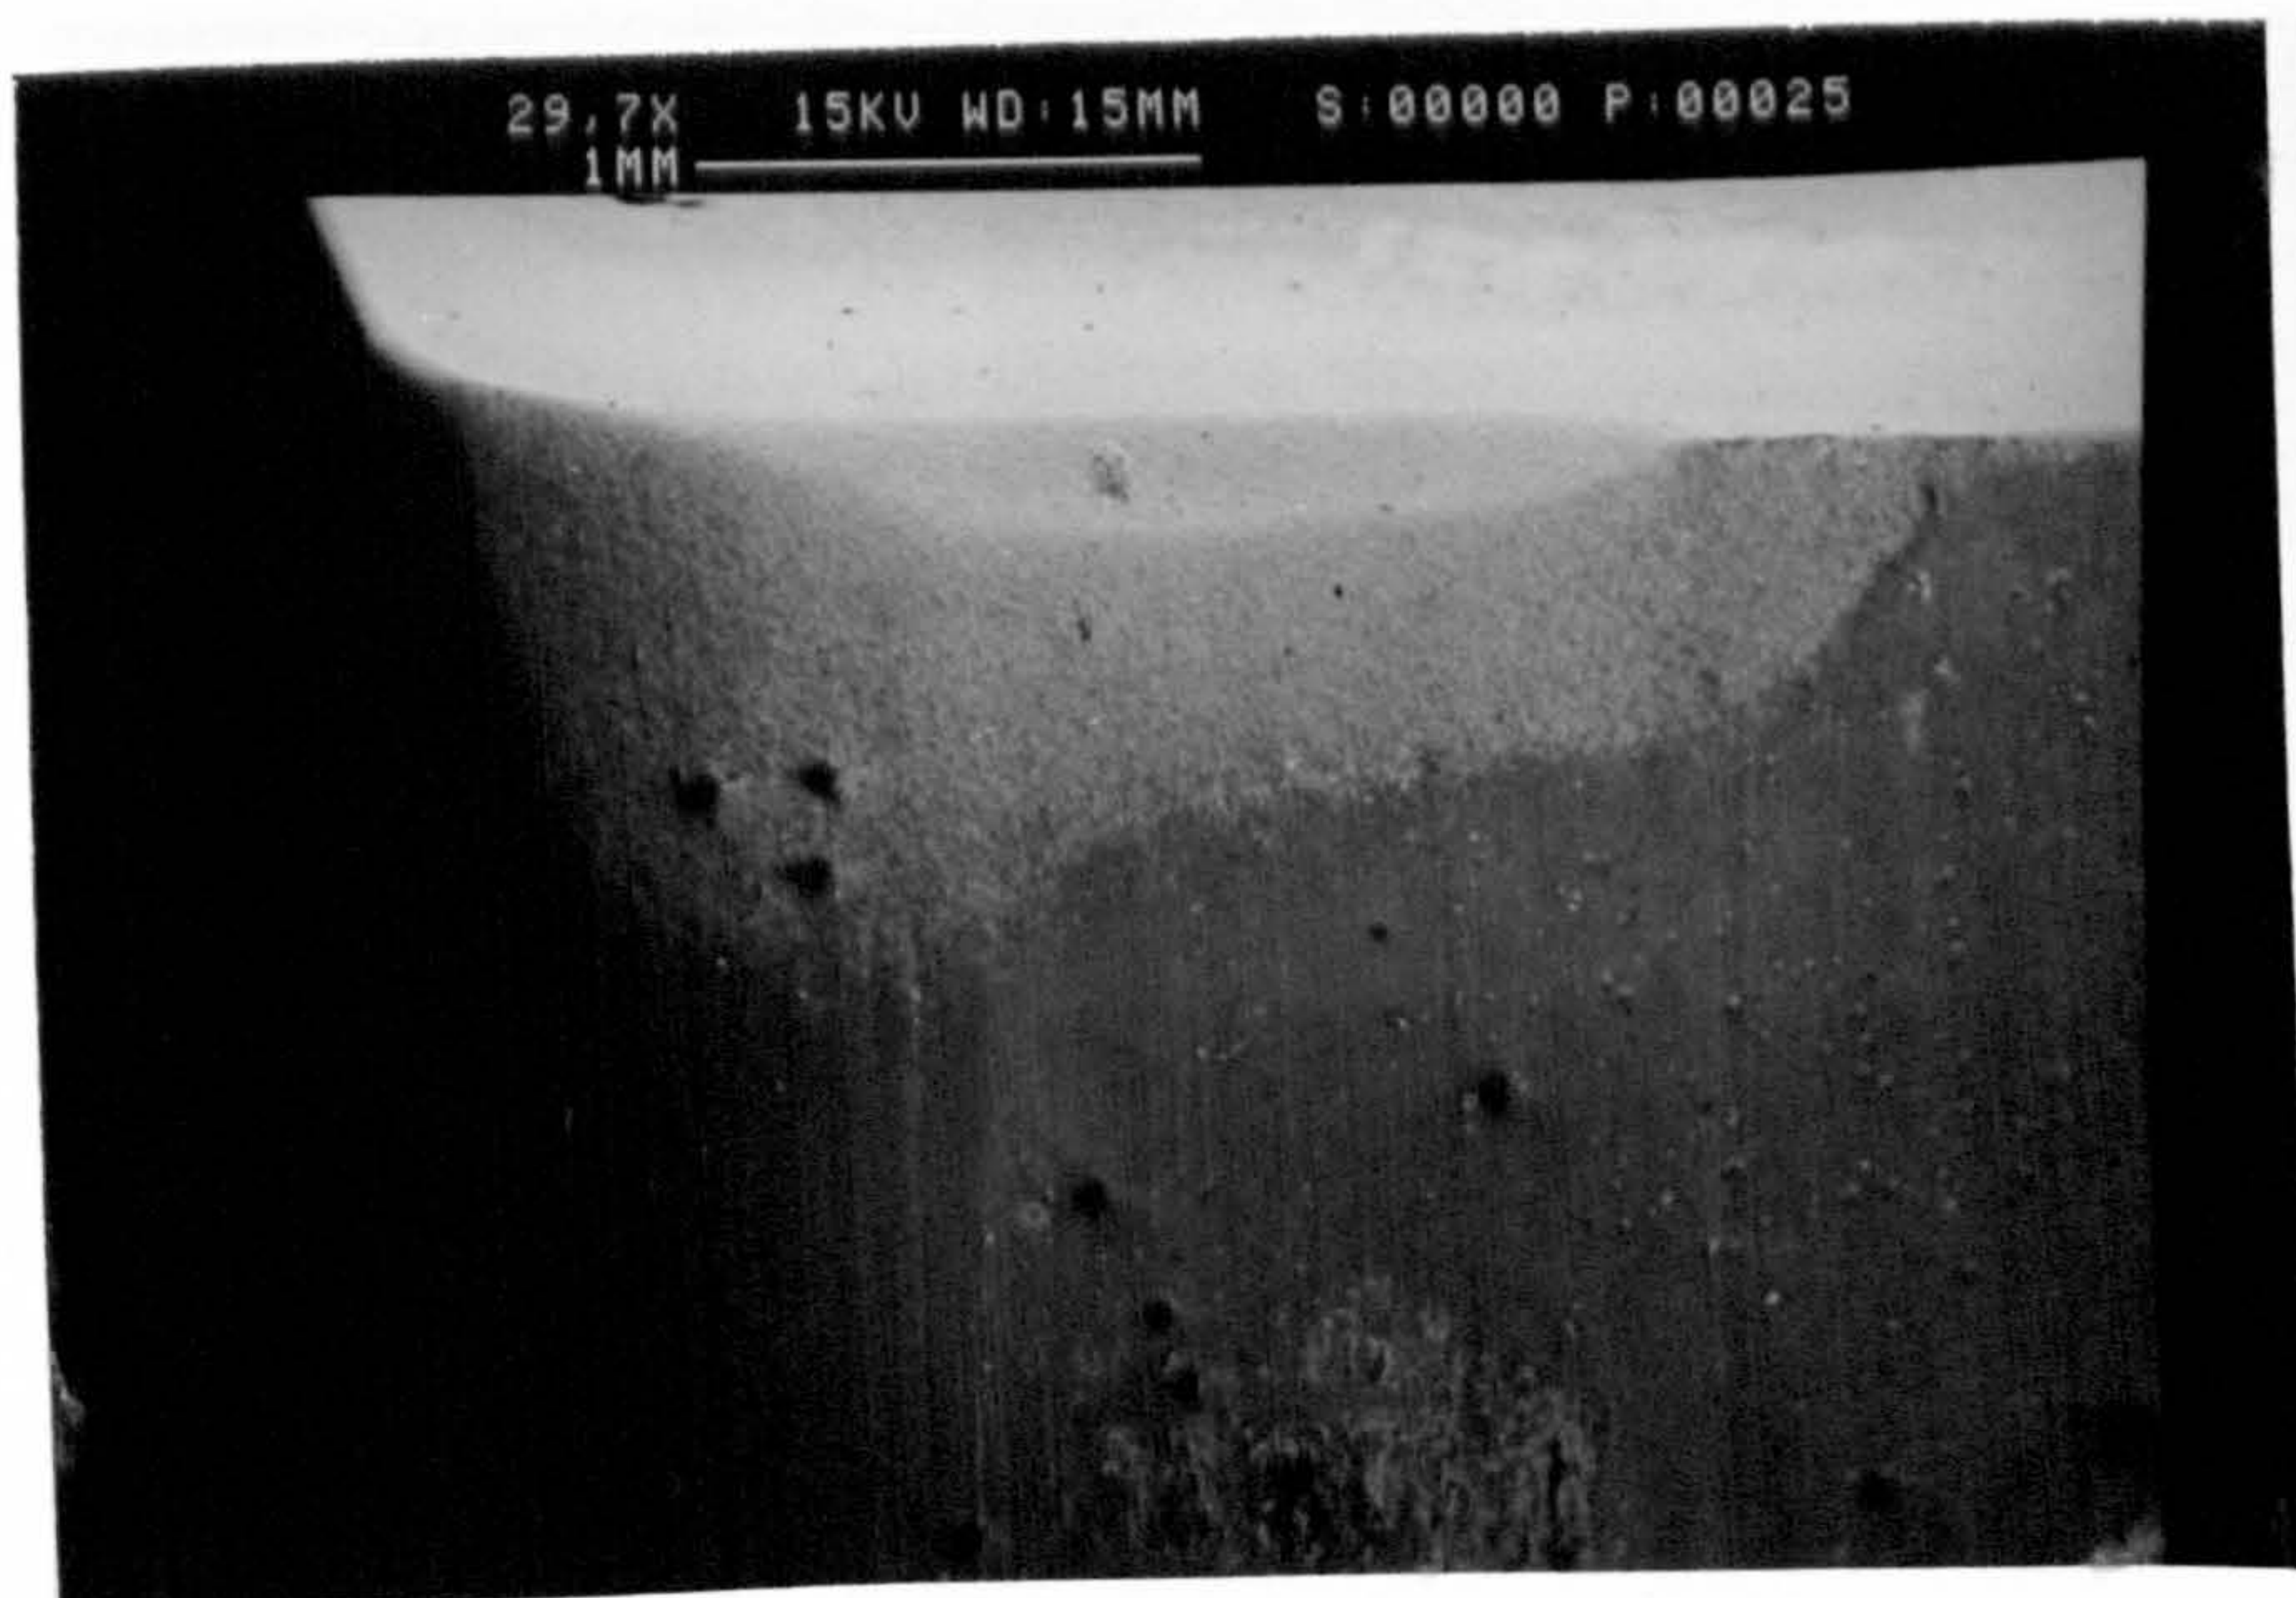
Typical wear pattern of a P10 carbide tool showing severe wear near the cutting edge
